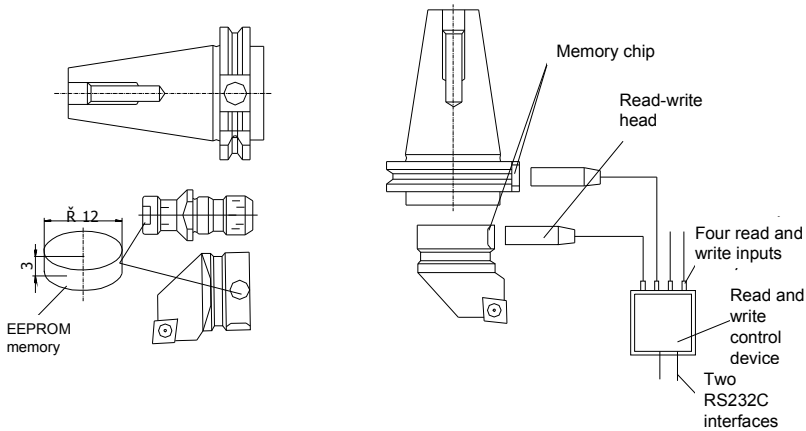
Placing of memory chips (EEPROM) in the tool holder by microchip tool identification
